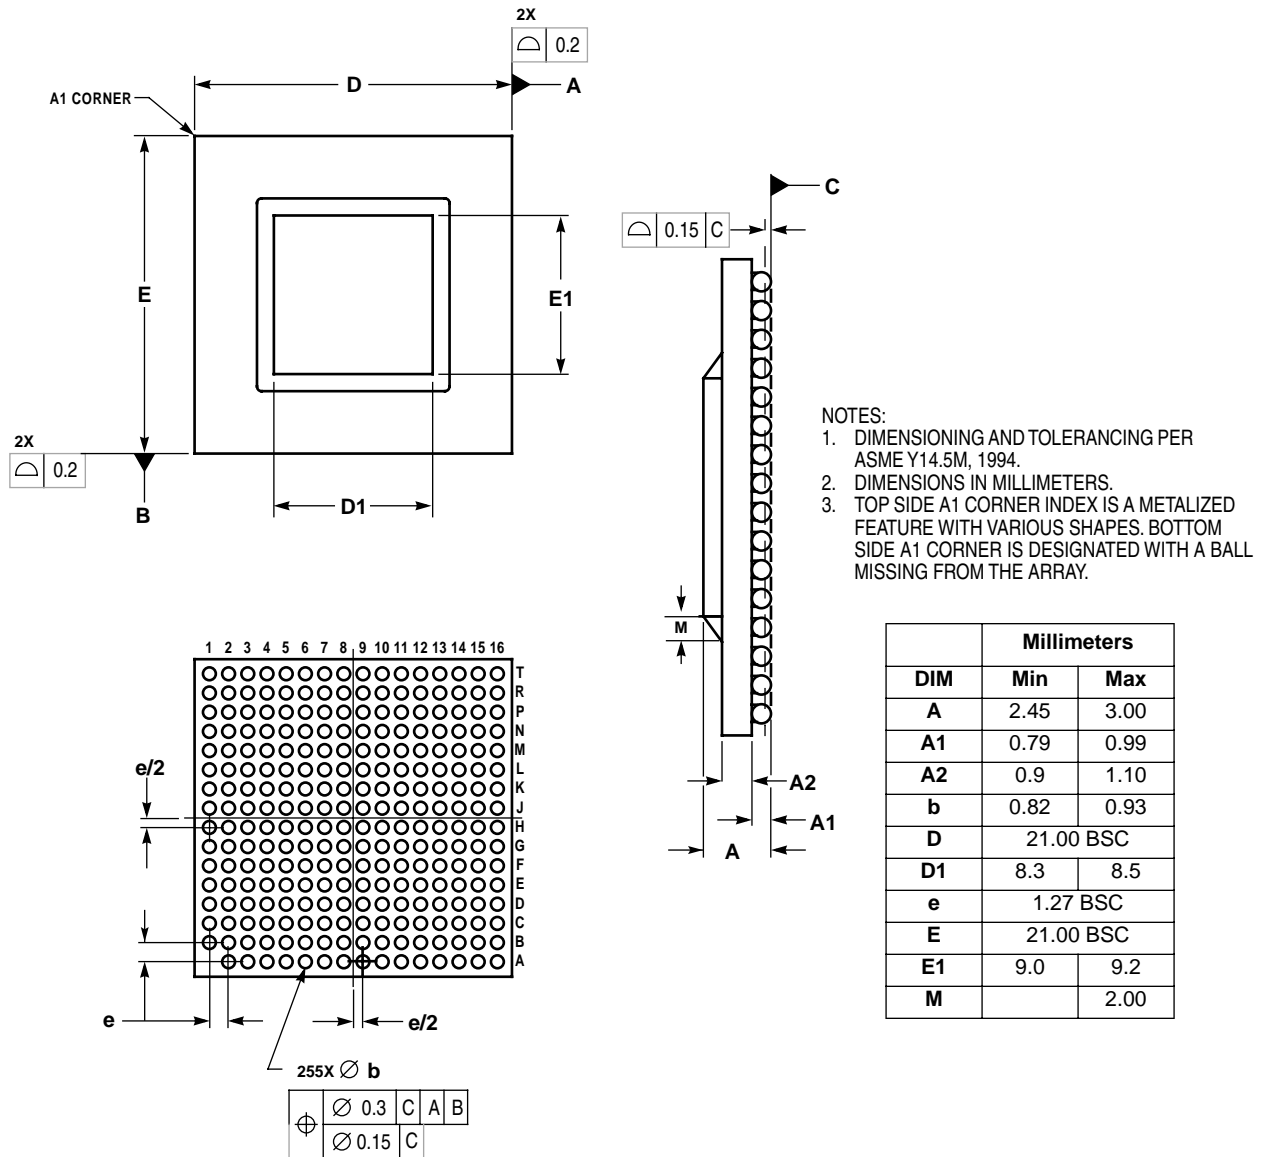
Mechanical Dimensions and Bottom Surface Nomenclature of the XPC740P
